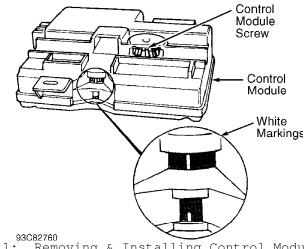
Removing & Installing Control Module Courtesy of Volvo Cars of North America
